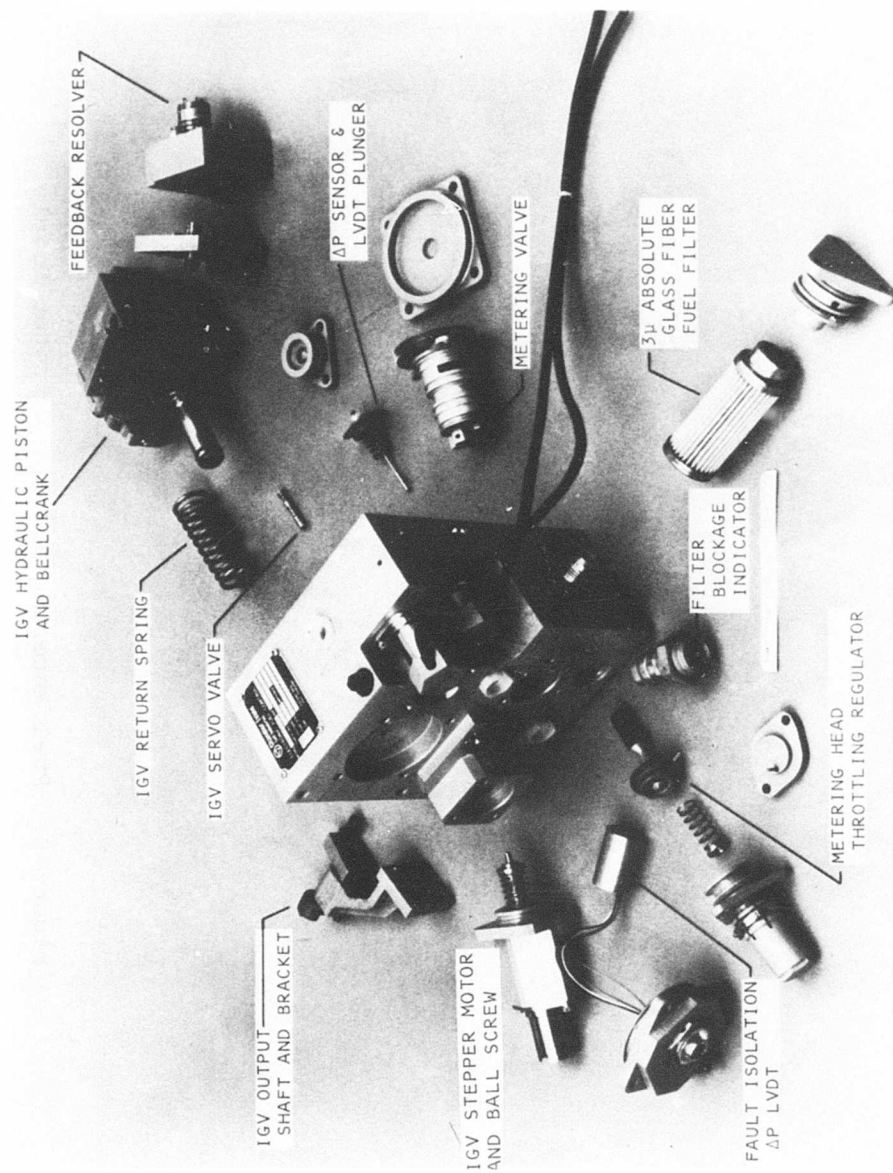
Fuel Metering and IGV Actuator Module Disassembled
